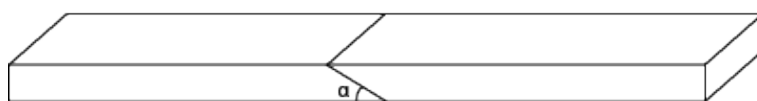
A Specimen Drawing Repaired with Single Scarf
